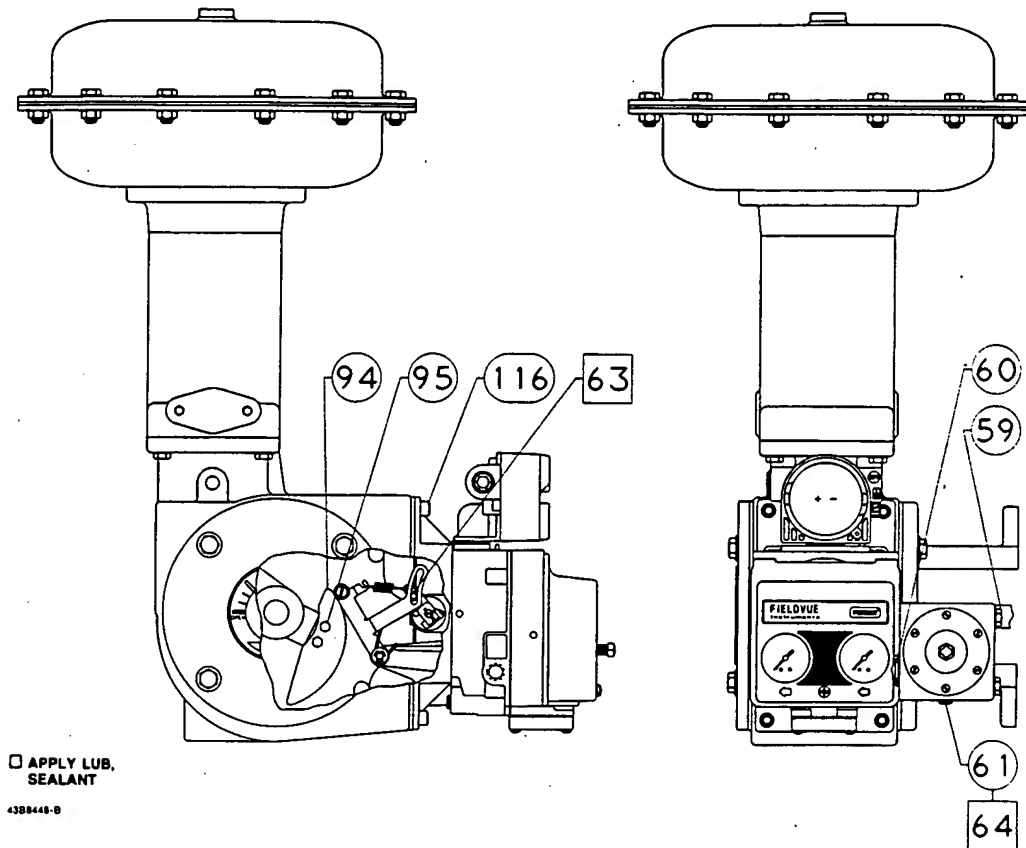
Type DVC5020 Series Digital Valve Controller Mounted on Type 1051 Size 40 Actuator with Integrally Mounted Filter Regulator
